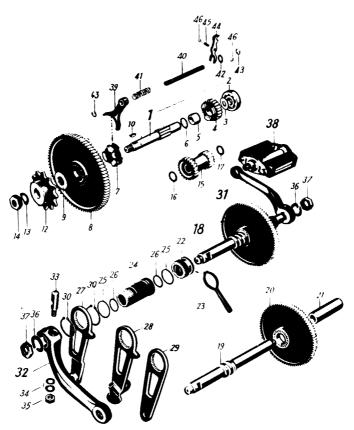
GEARBOX AND PEDAL COMPONENTS
